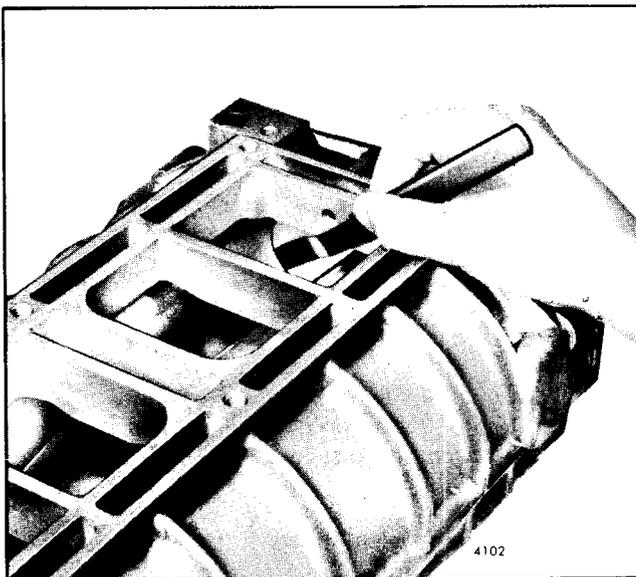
Measuring End Clearance Between Blower Rotors and End Plate
